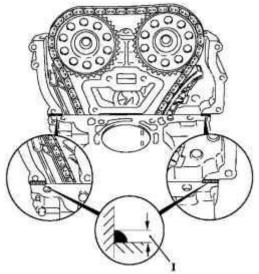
The experimental setup is laying on the hull valve timing mechanism
